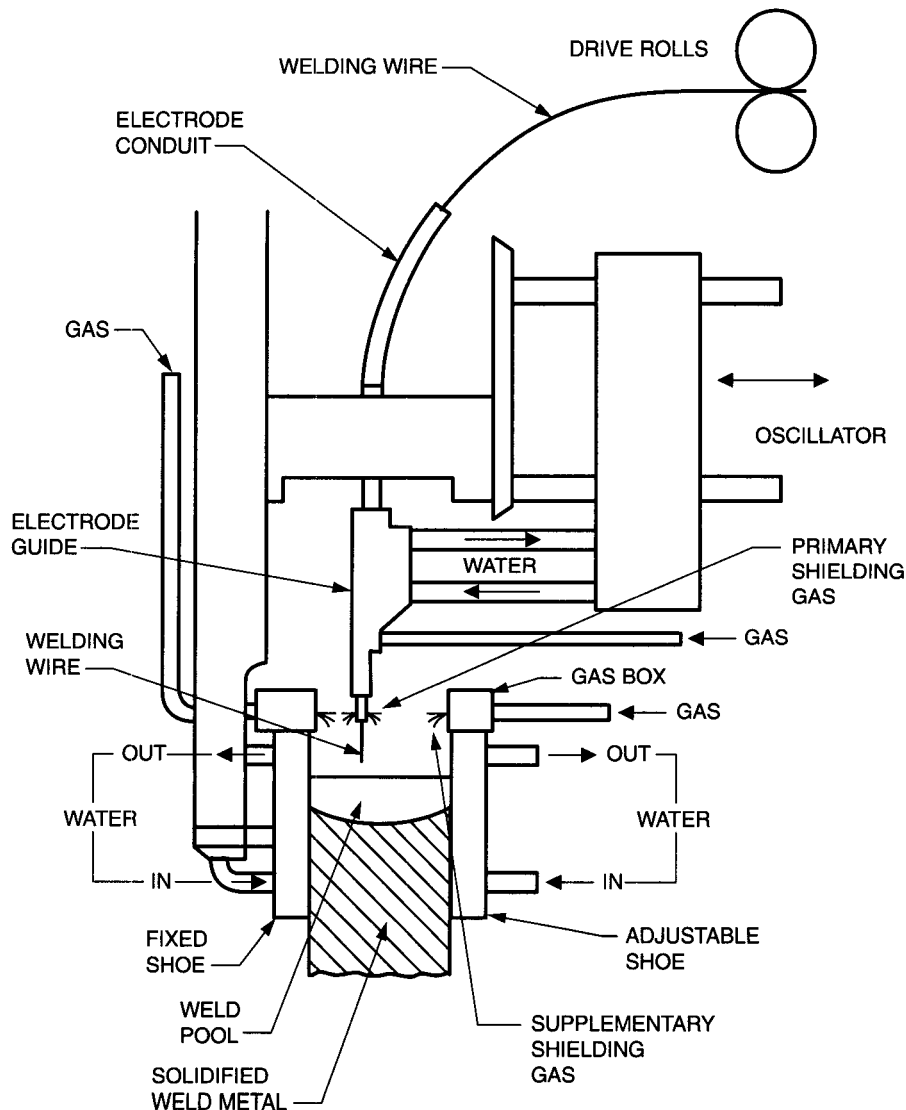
Electrogas Welding with a Solid Electrode
